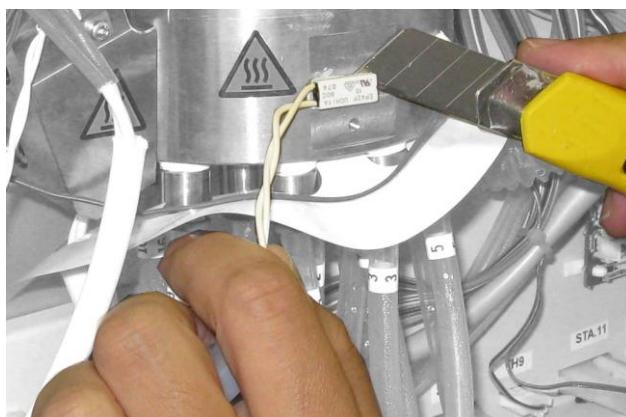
Removal of rotary valve over-temperature protector
